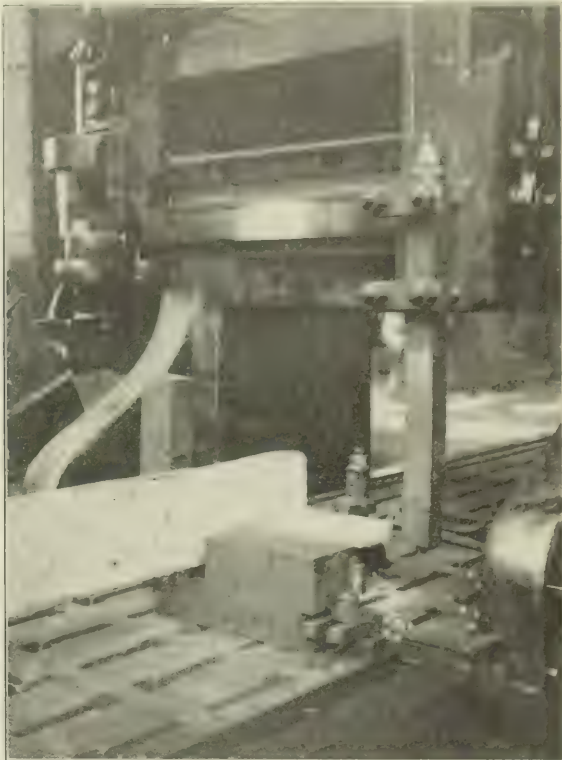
Slotting the End of a Grate Bearer Cross-Tie.
